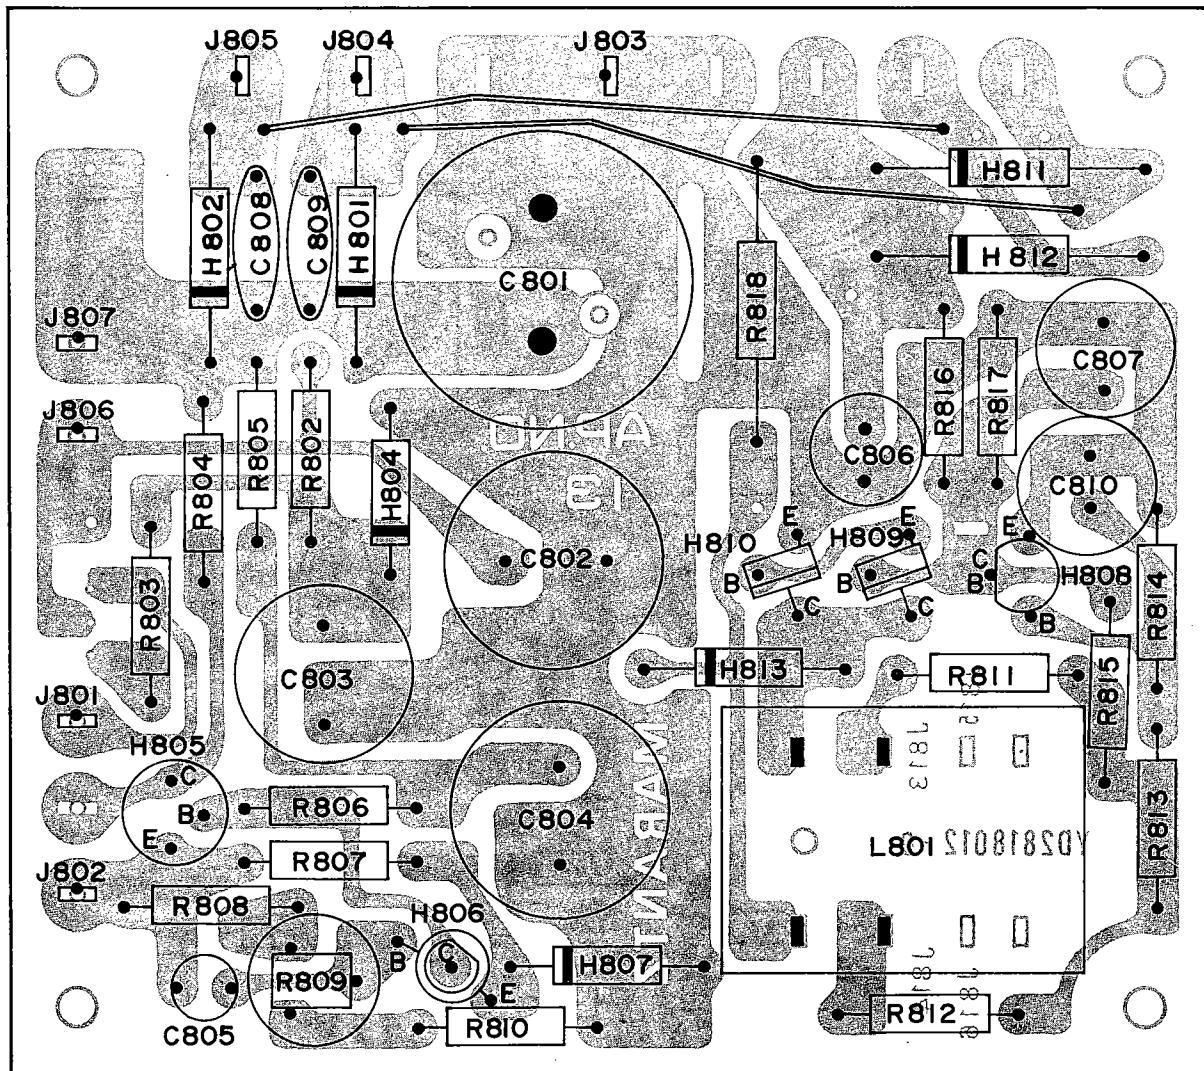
Regulated Power Supply and Protection Relay Circuit Assembly P800 Component Locations
